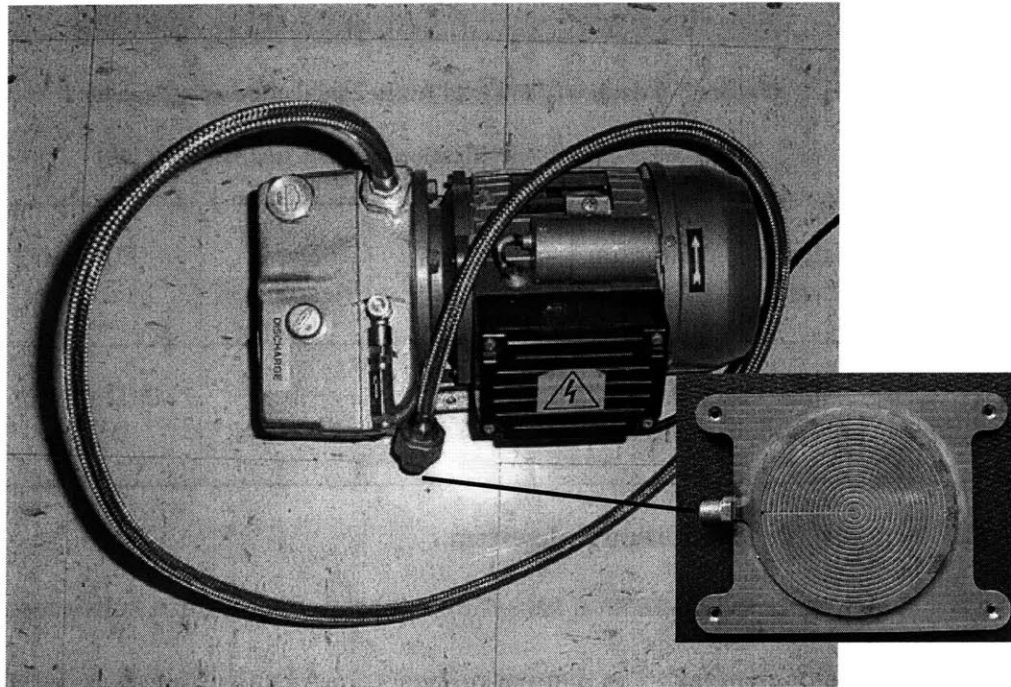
Vacuum pump and hose shown with vacuum chuck and barb
